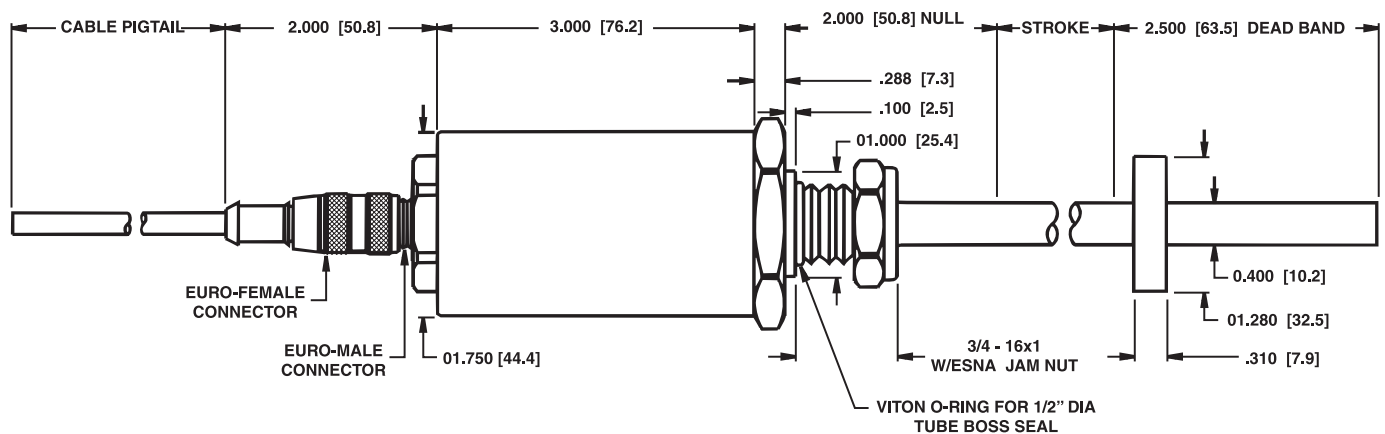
Mounting LDT in a Hydraulic Cylinder
